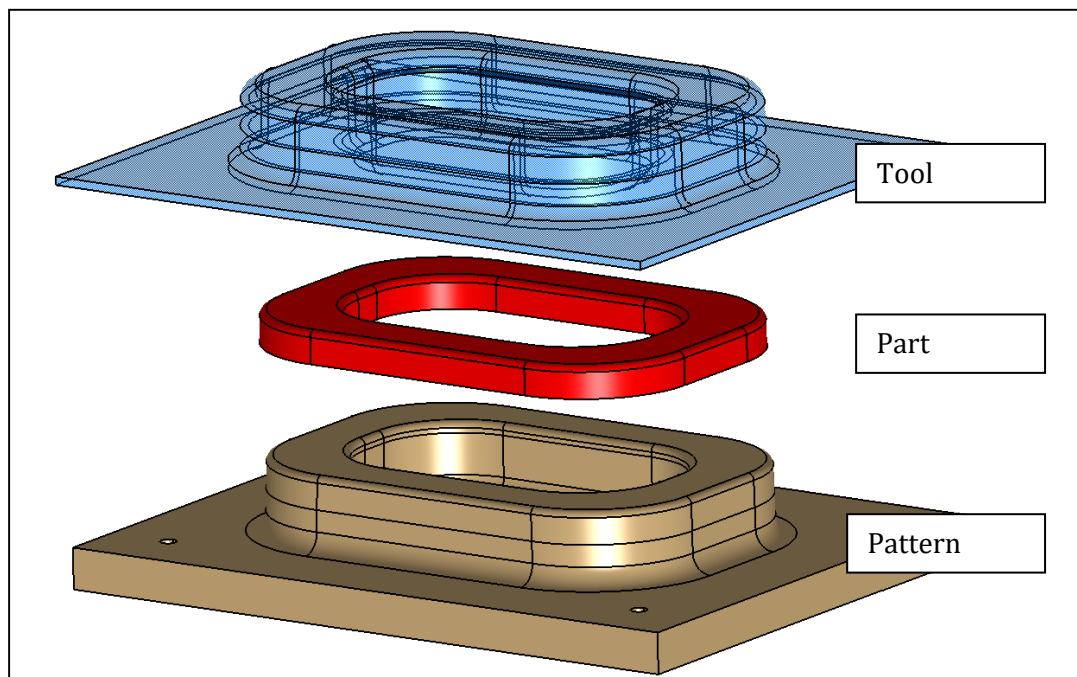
The design of a tooling board pattern, composite tool and aft rib
